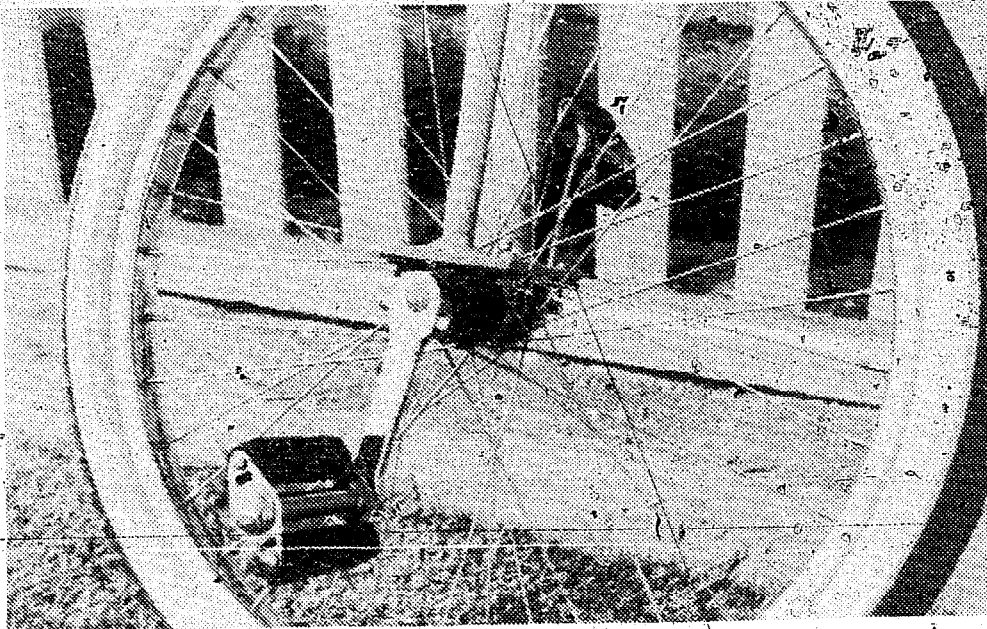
Bearing holders bolted to plates brazed to fork ends.
